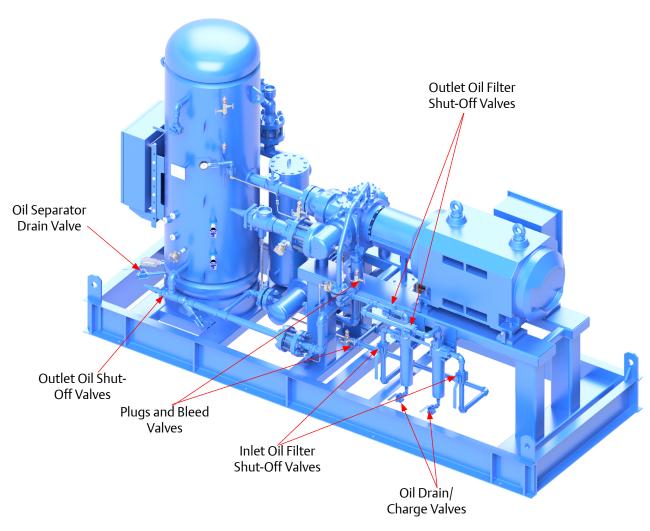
Dual Oil Filter (3677A Oil Filter Housings Shown)
